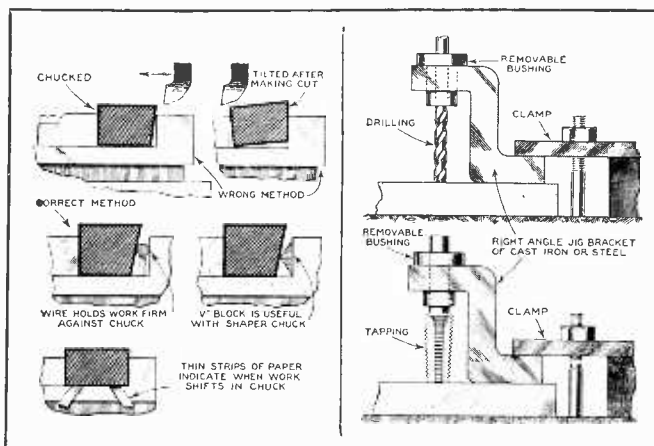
(left)—How to prevent movement of work while being machined. Fig. 3 (right)—An inexpensive jig will prove helpful in any jiggling or tapping of holes.
